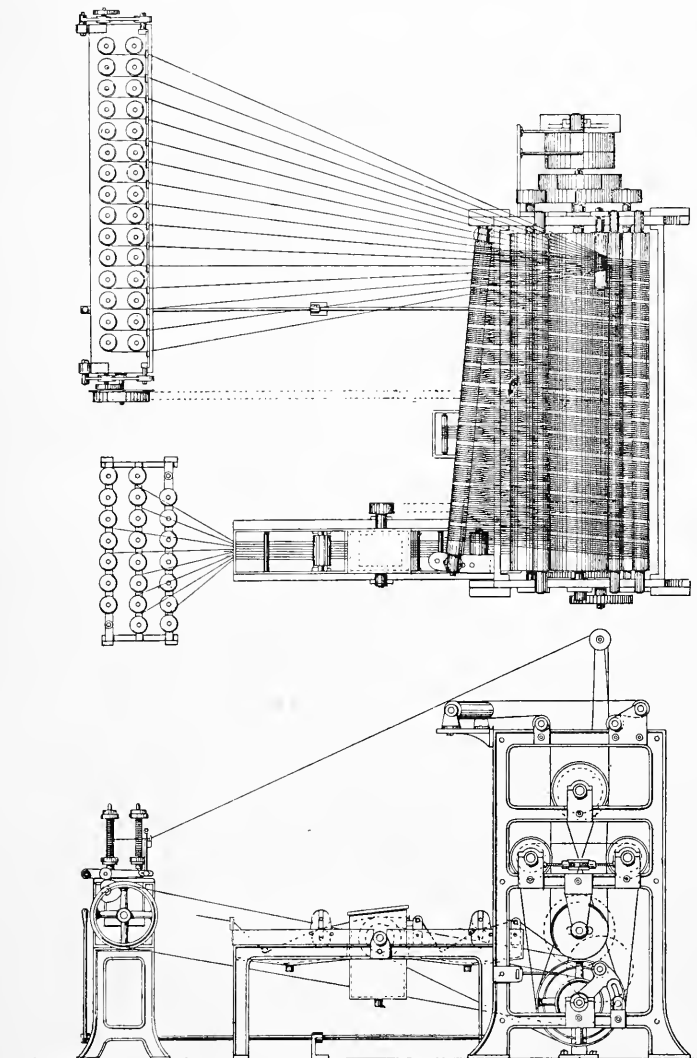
Twine polishing machine. (Made by Mr Wm. Bywater, L. eds.)
